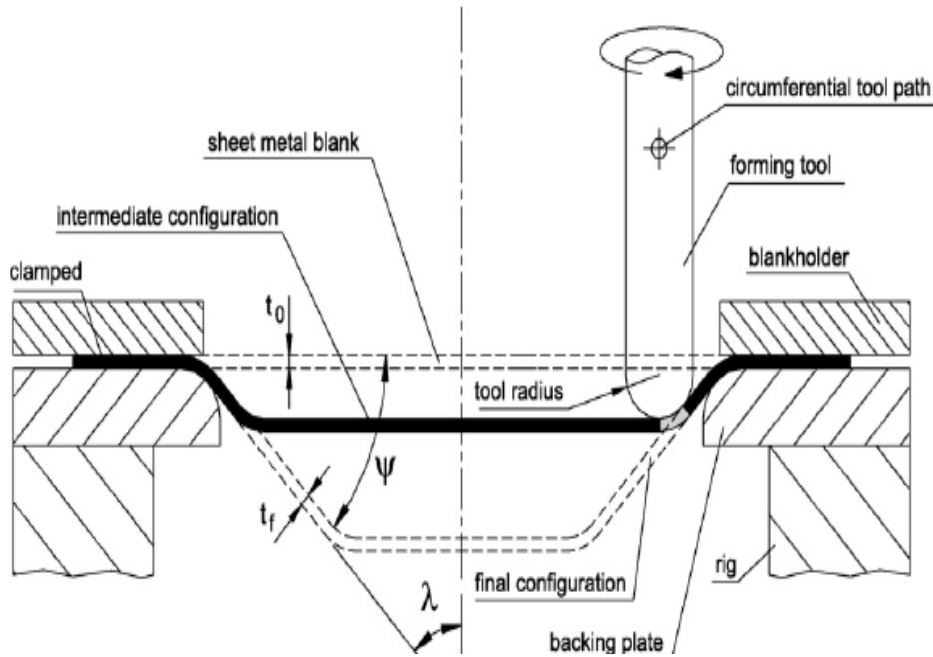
Single Point Incremental Sheet Metal Forming Process.[2]
